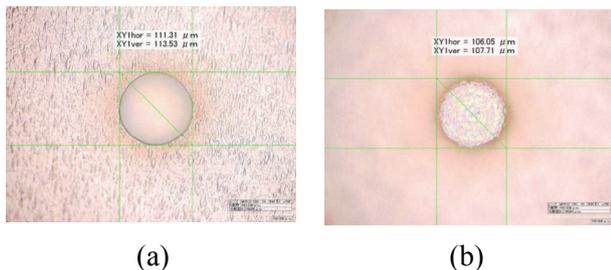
Optical microscope images of the through-hole focused on the (a) top surface, (b) bottom surface.
